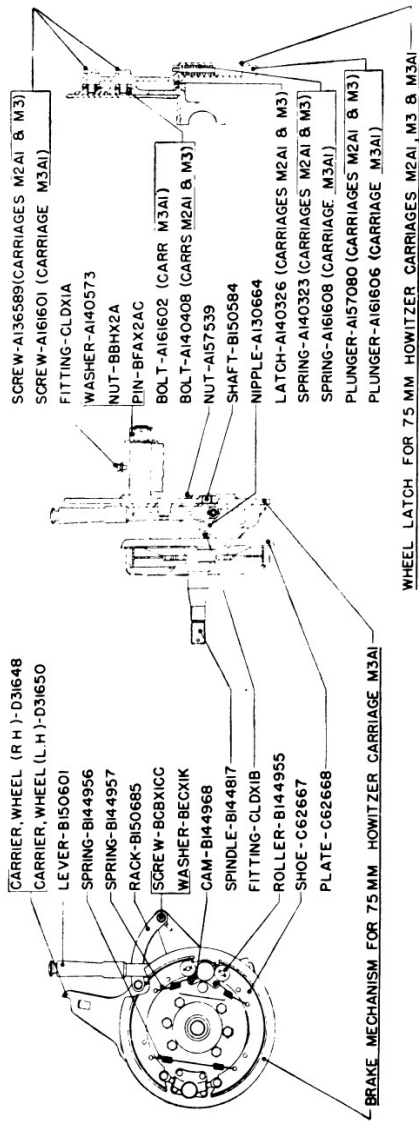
75-mm howitzer carriages—wheel group assembly.
